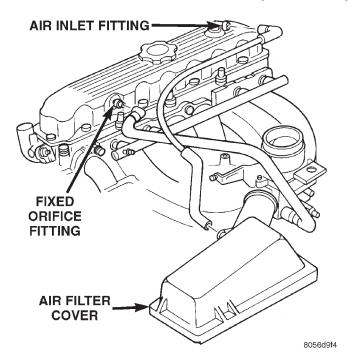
Crankcase Ventilation (CCV) Hose—2.5L Engine
